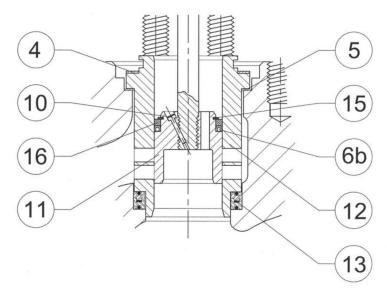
Mark H-900, H-1500 and H-2500 Valve Body Showing Mark ET Trim
